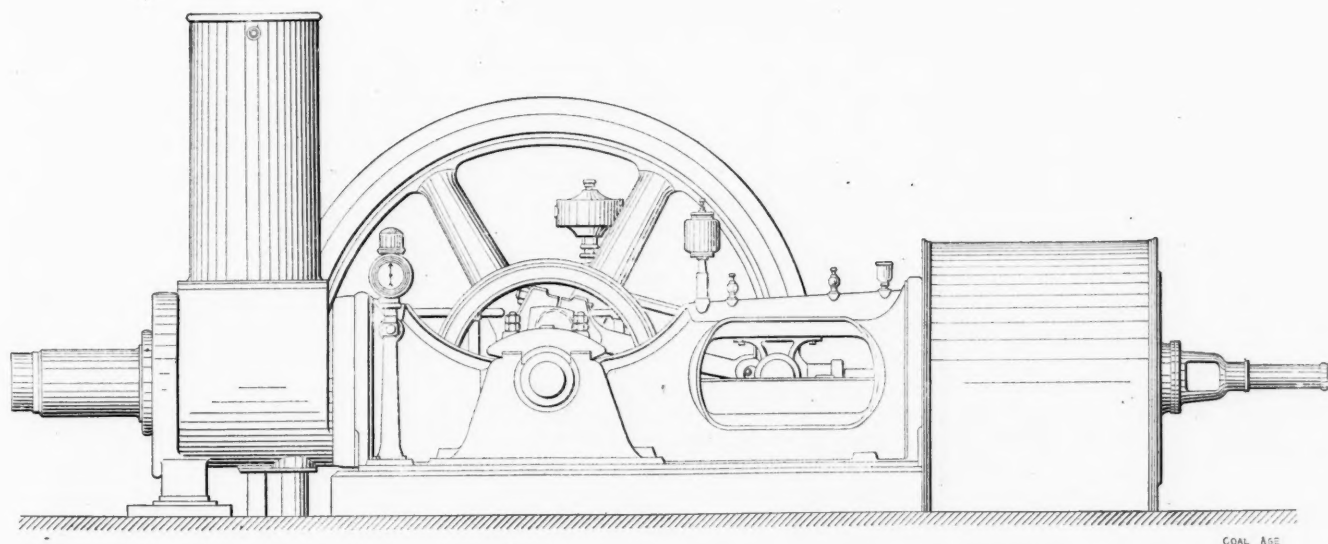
SIDE VIEW OF FOUR-STAGE, EXHAUST-STEAM-DRIVEN AIR COMPRESSOR
